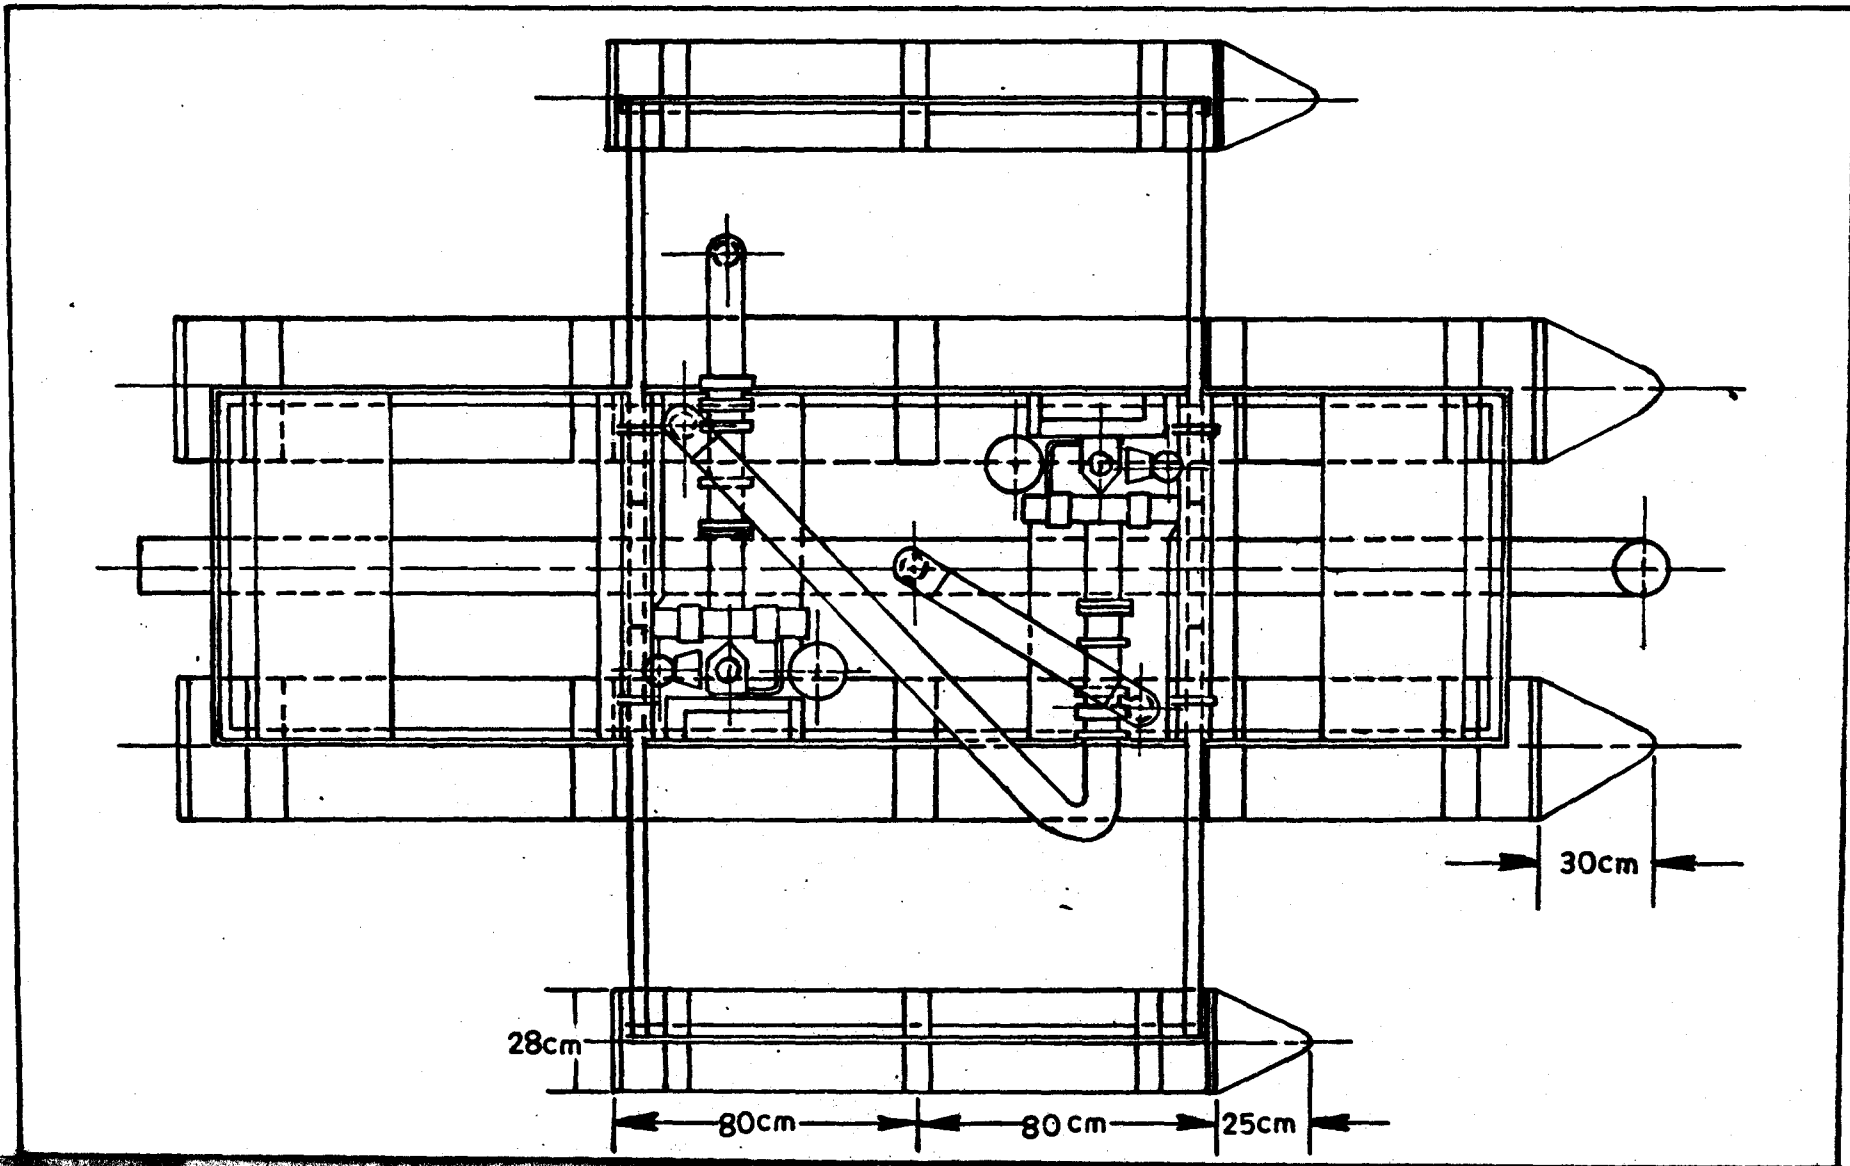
Prototype Salvinia Harvesting Machine - elevation view
